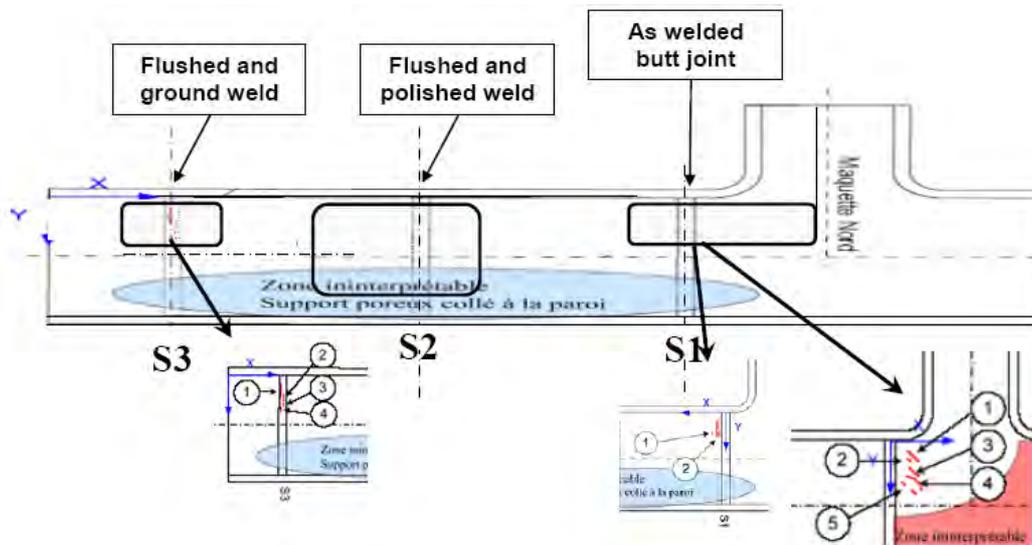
Second half mock-up containing the as welded butt joint S1 and the flushed welds S2 and S3 – Long dye penetrant inspection results and location of plate samples containing all defect indications
